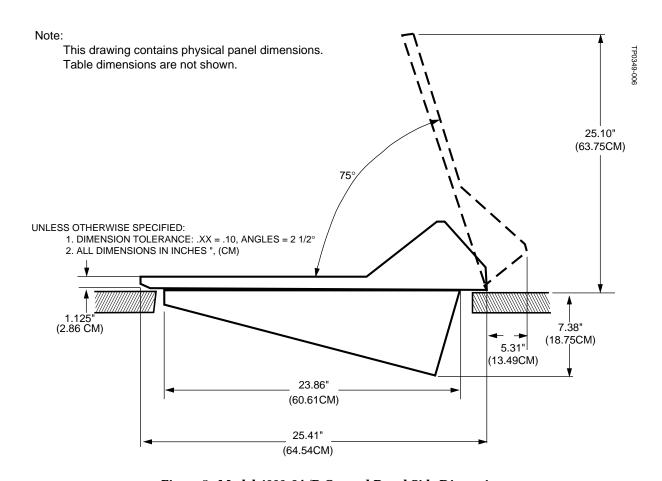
Model 4000-2A/B Control Panel Side Dimensions
